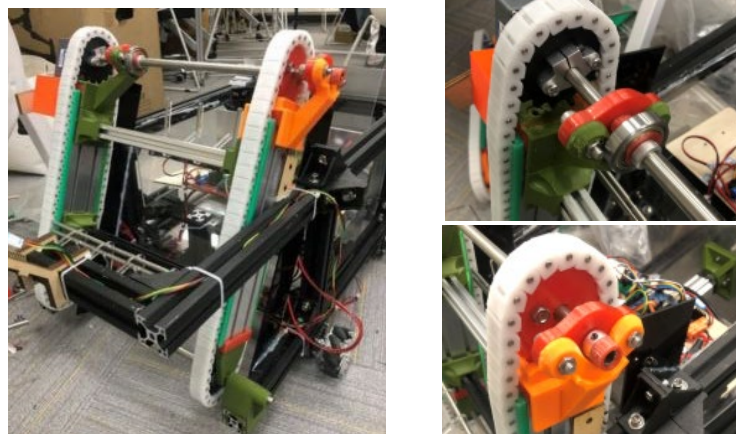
Design for the 3D printed parts used in the conveyor unit.
